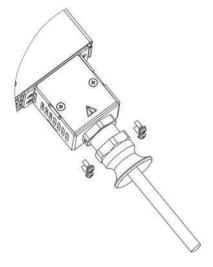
Strain Relief Bracket Assembled to Power Source Rear Panel
